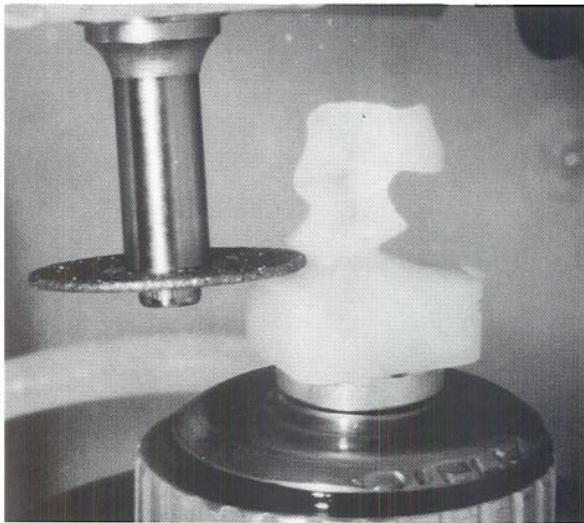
The micro-milling machine tool (on the right side of the machine).
